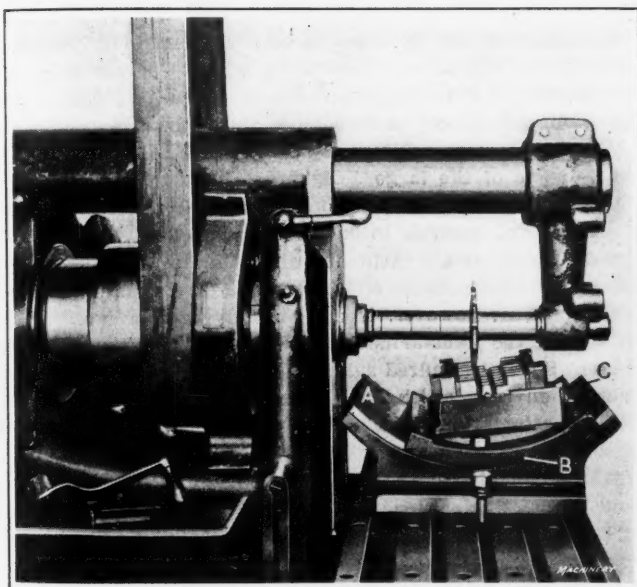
Position of Fixture for cutting Angular Side of End Slot
